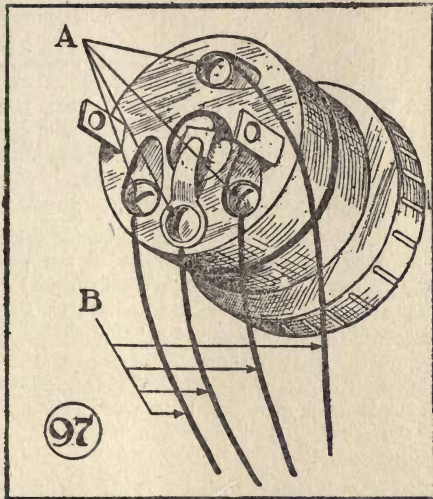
The switch may cause trouble. A shows possible loose or poorly made connections shorting into switch housing. B shows possible wires grounding at point of entering switch housing or conduit on steering column.
